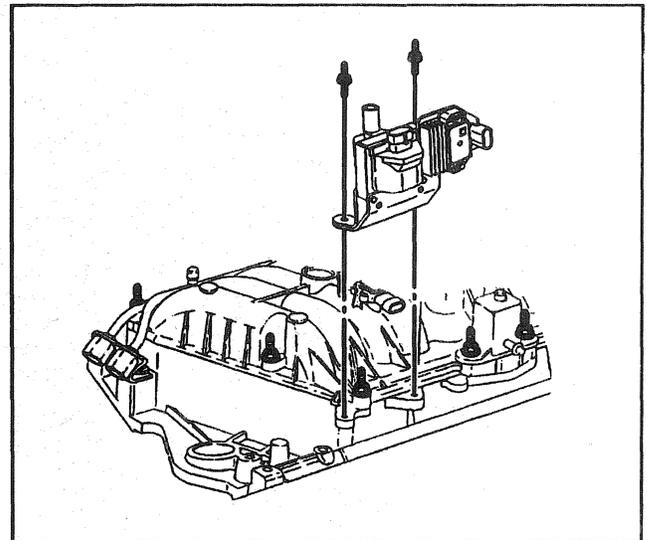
Ignition Coil Mounting (5.0L and 5.7L)
